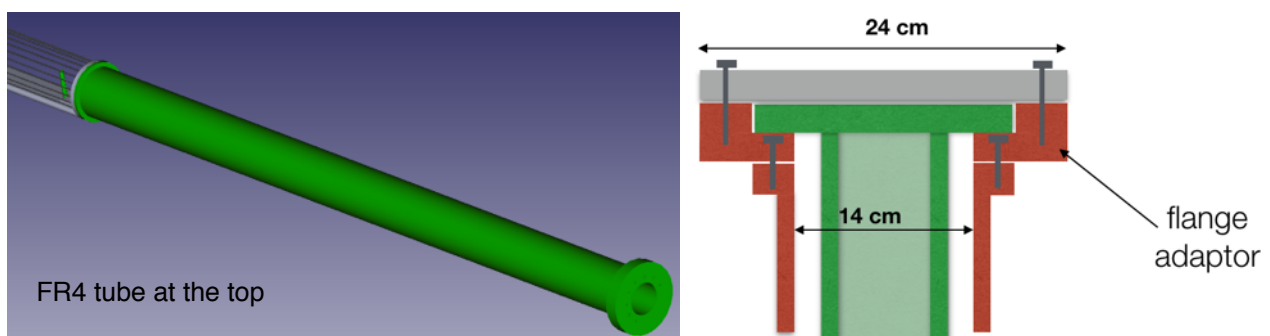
Left: 3D model of the FR4 tube at the top of the T-gradient monitor. Right: conceptual design of the FR4 tube resting on the flange adaptor.
